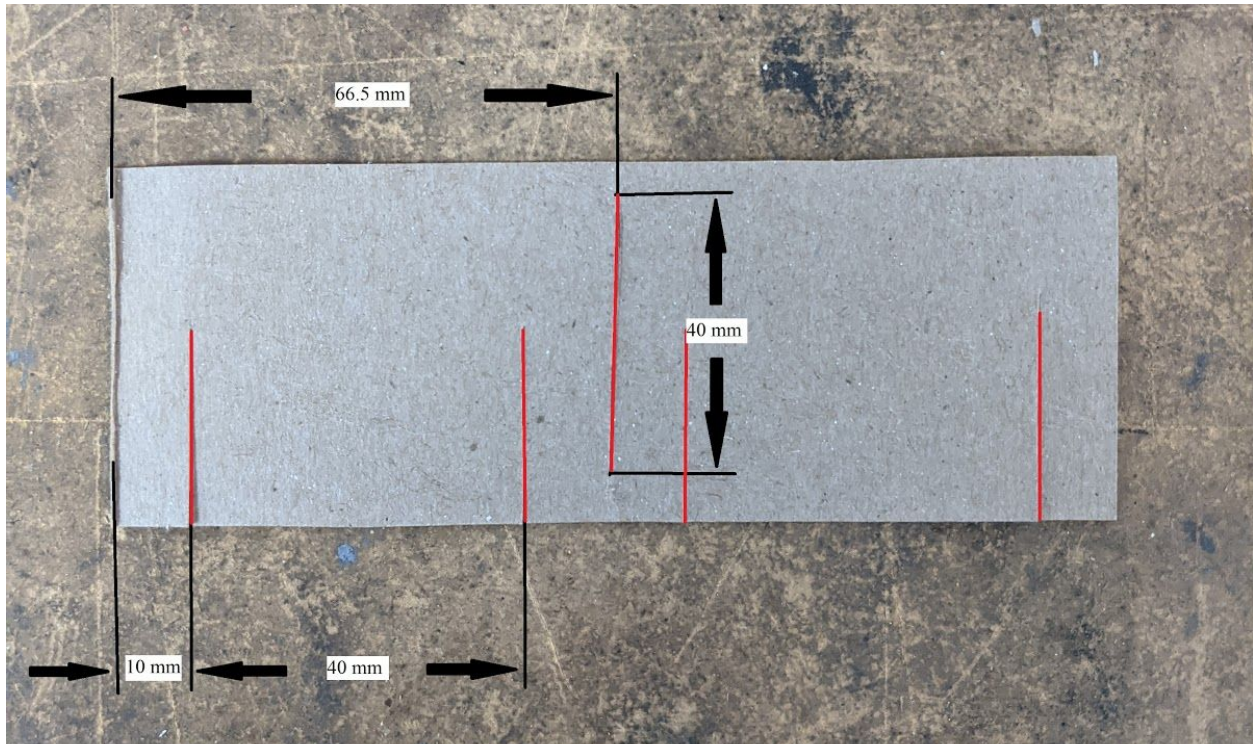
Control Surface Cut Dimensions (Horizontal Stabilizer)
